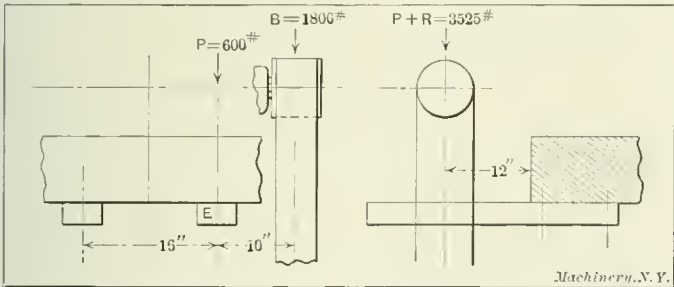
Motor Support of Machine-steel Bars, with Right-angle Drive
